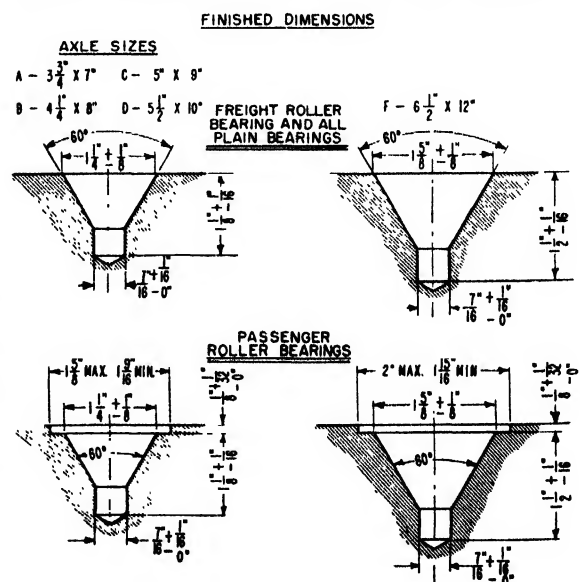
Standard dimensions of centering holes cut in the ends of axles in United States Steel Corporation plants.
